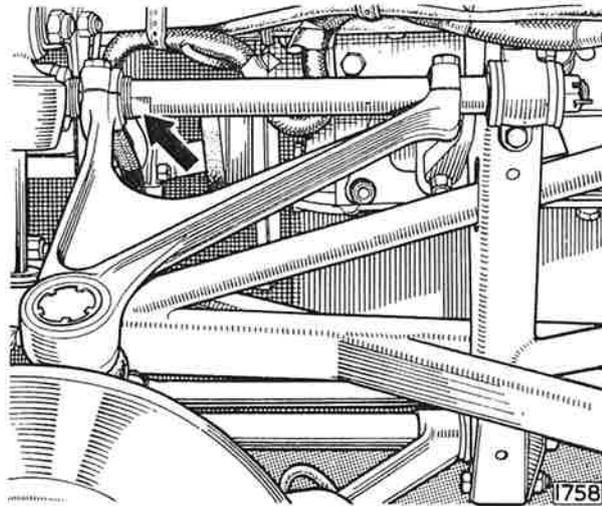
The castor angle is adjusted by rotating the shaft indicated by the arrow.
